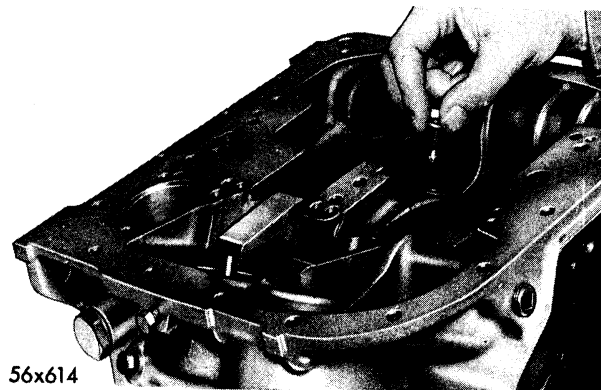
Removal and Installation of Intermediate Support Locating Screw
